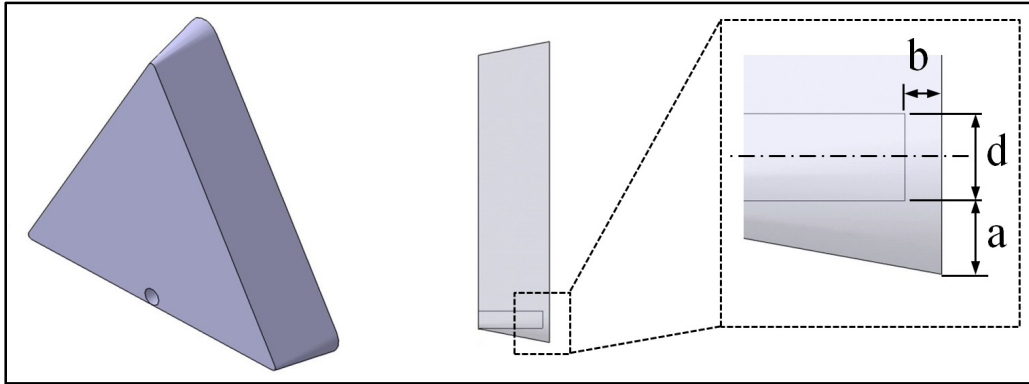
Hole position inside the cutting insert for embedded thermocouple
